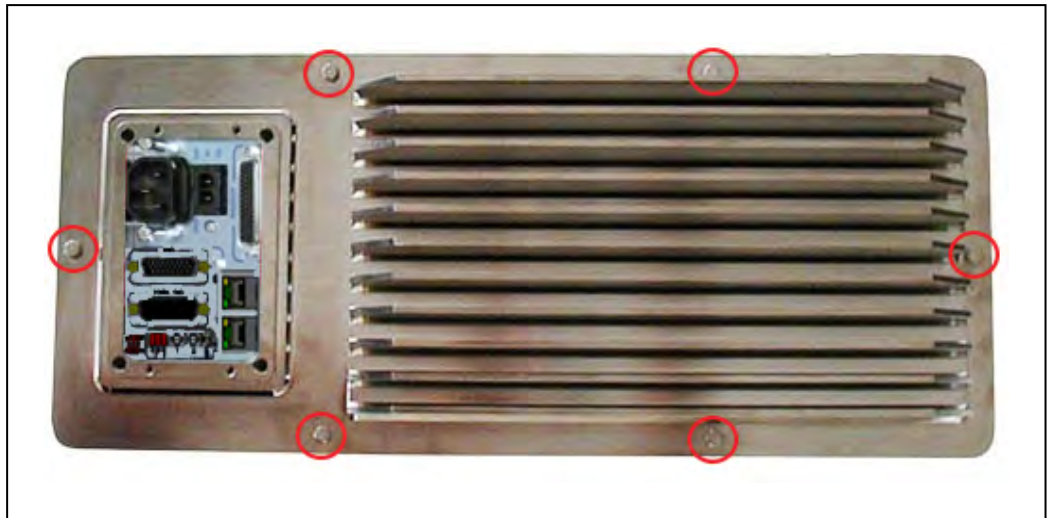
iCS-ECAT Chassis-securing Bolts, Circled
